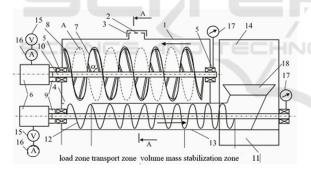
Automobile gas generator feeder construction: 1 - bunker-turner; 2 - loading hatch; 3 - hatch cover; 4 - unloading window; 5 - bearing units; 6 - drives of the screws of the pellet burner and bunker - turner; 7 - rib-blade; 8 - tape auger; 9 - clutch; 10 - the shaft of the tape auger 8; 11 - ash pan; 12 - continuous auger of a pellet burner; 13 pellet burner; 14 - gasification chamber.
